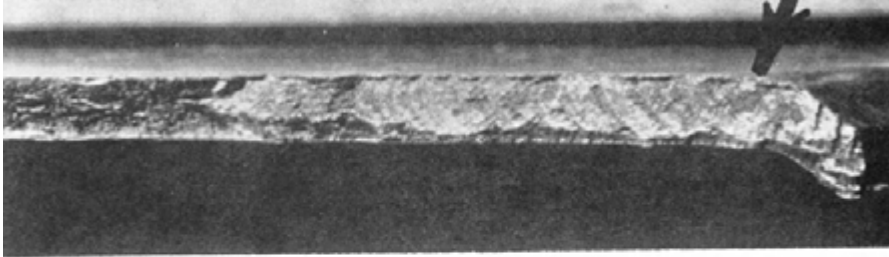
A-36 Fatigue failure of connecting rod
